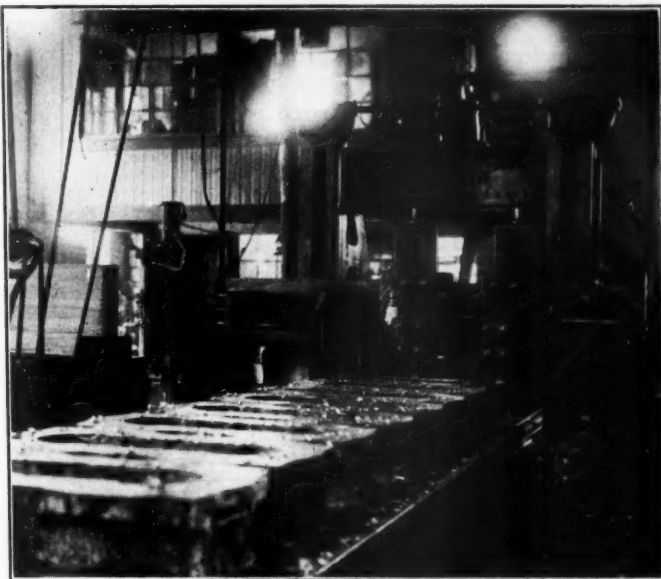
Layout of Machine Tools in the Driving Box Gang
